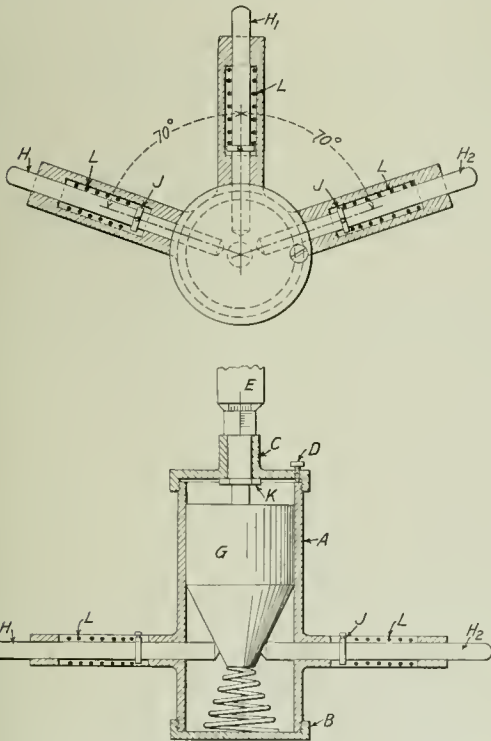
Three Prong Micrometer Caliper for Measuring the Driving Box Bore
